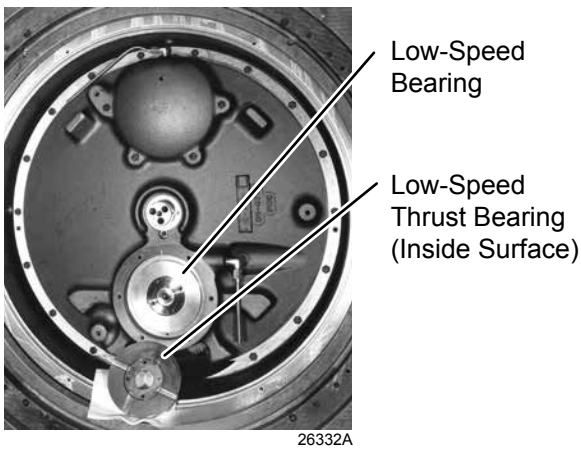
LOW-SPEED THRUST BEARING
